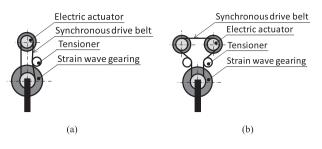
Multi-motor drive system: (a) single motor drive system, (b) double motor drive system.
